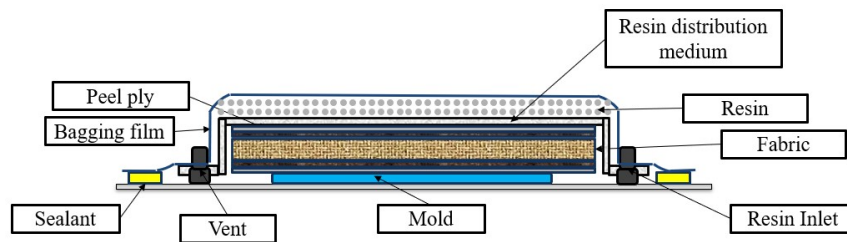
Schematic of resin transfer molding (RTM) technique
